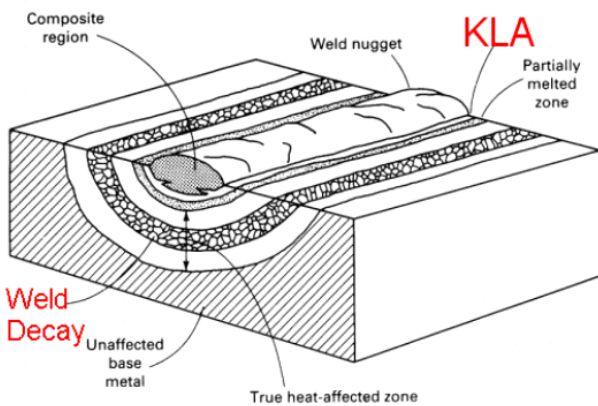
Location of knife line attack (KLA) and weld decay.
